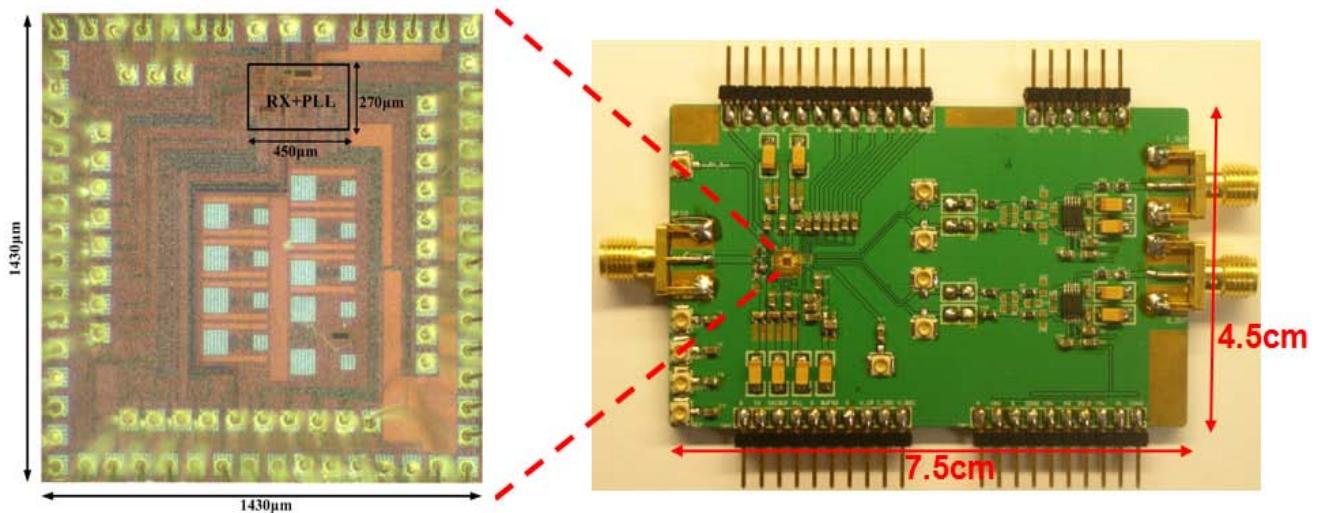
Chip die photo and a printed circuit board (PCB).
